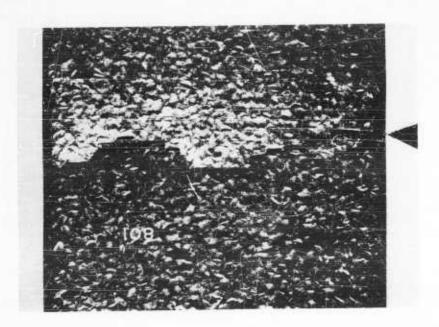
FAILURE IN SPECIMEN NO. 108
